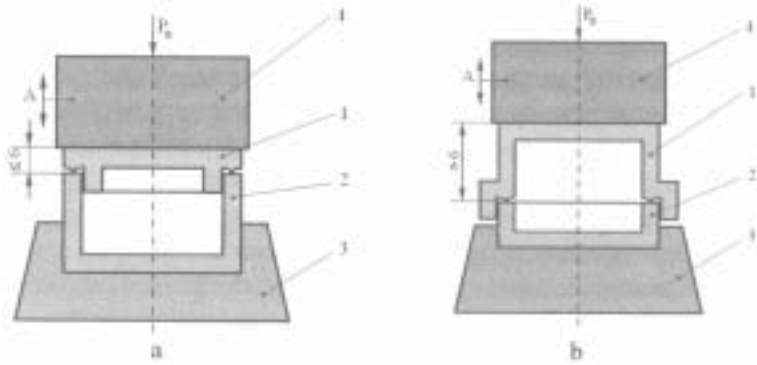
Welding methods of some materials combinations: a - near field welding; b - far field welding. 1 - upper part; 2 - lower part; 3 - acoustic anvil; 4 - sonotrode; P_s - static force of pushing; A - sonotrode amplitude of oscillation
